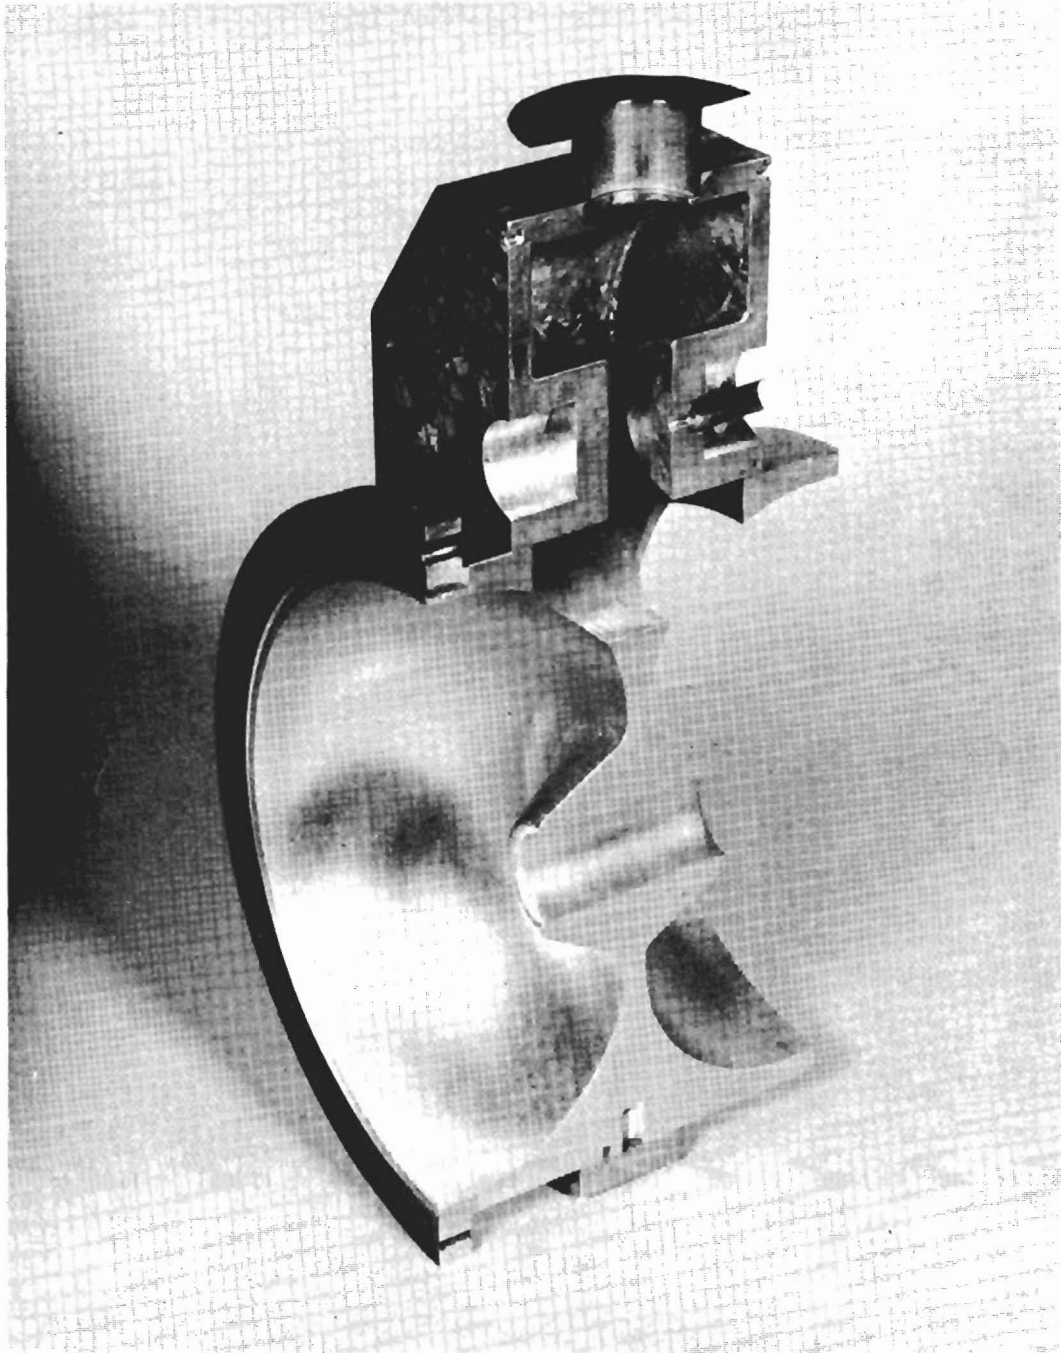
Cut Away Section of EPA Accelerating Segment-Coupling Cell Assembly
